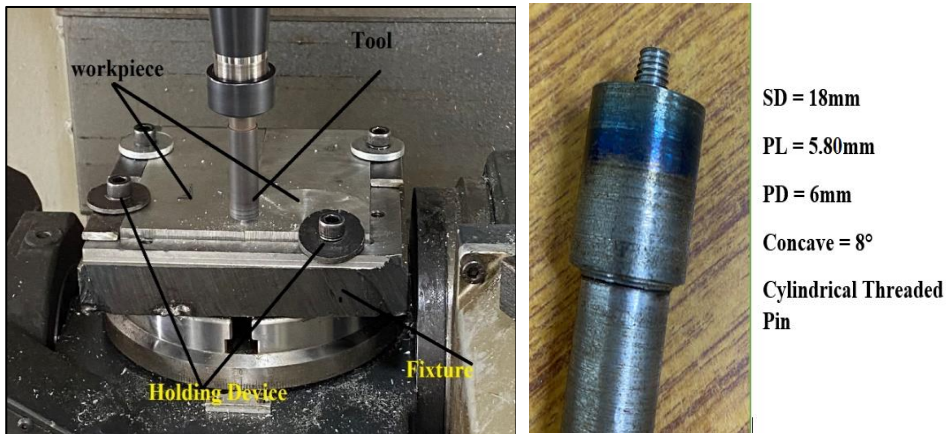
Fixture and tool used in the FS-welding process
